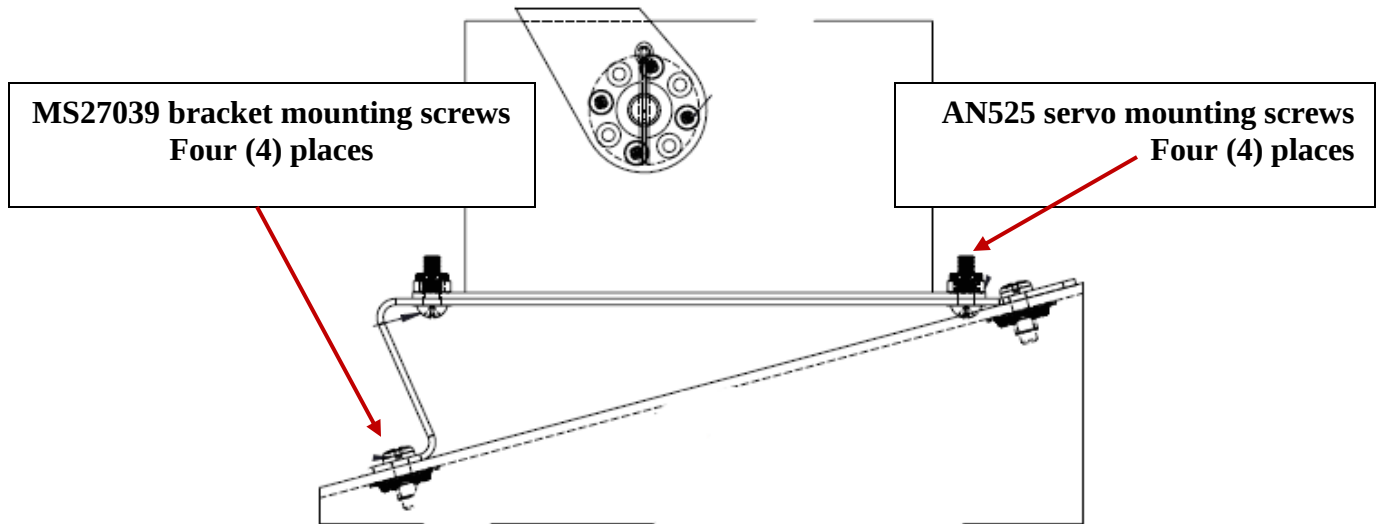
SERVO AND MOUNT ASSEMBLY ON PART 38
